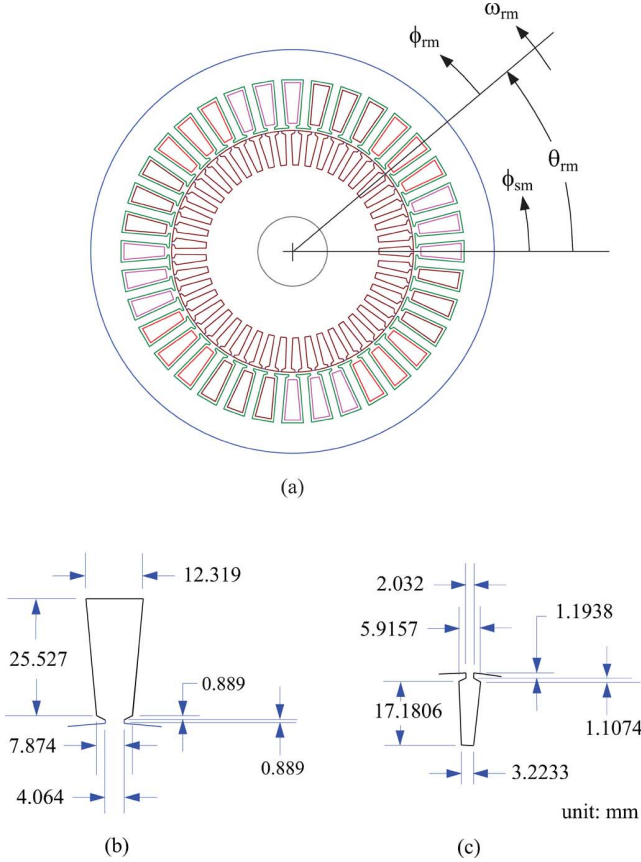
Three-phase four-pole squirrel-cage induction machine. (a) Cross-section view of the induction machine and coordinate system. (b) Stator slot dimension. (c) Rotor slot dimension.
